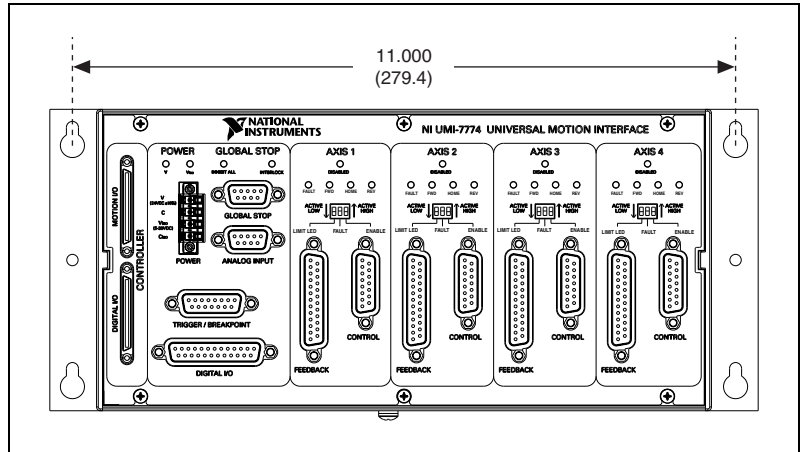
UMI-7774/7772 Front View with Horizontal Panel Mount Dimensions
